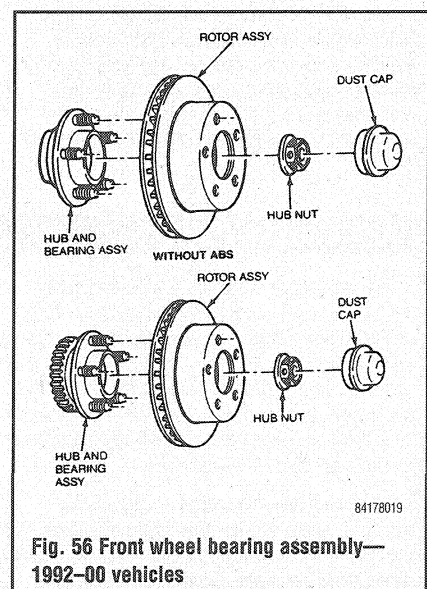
Front wheel bearing assembly—1992–00 vehicles
